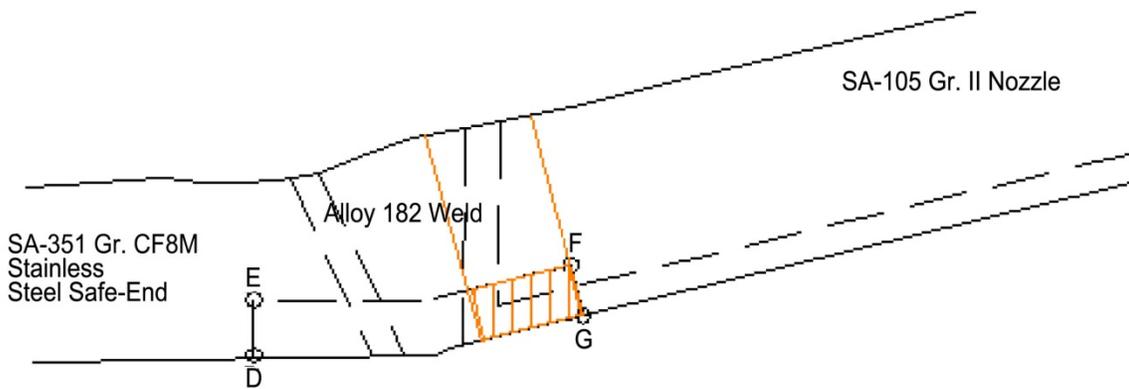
Surge Nozzle Weld Circumferential Axial Scan CRV Coverage Assessment
